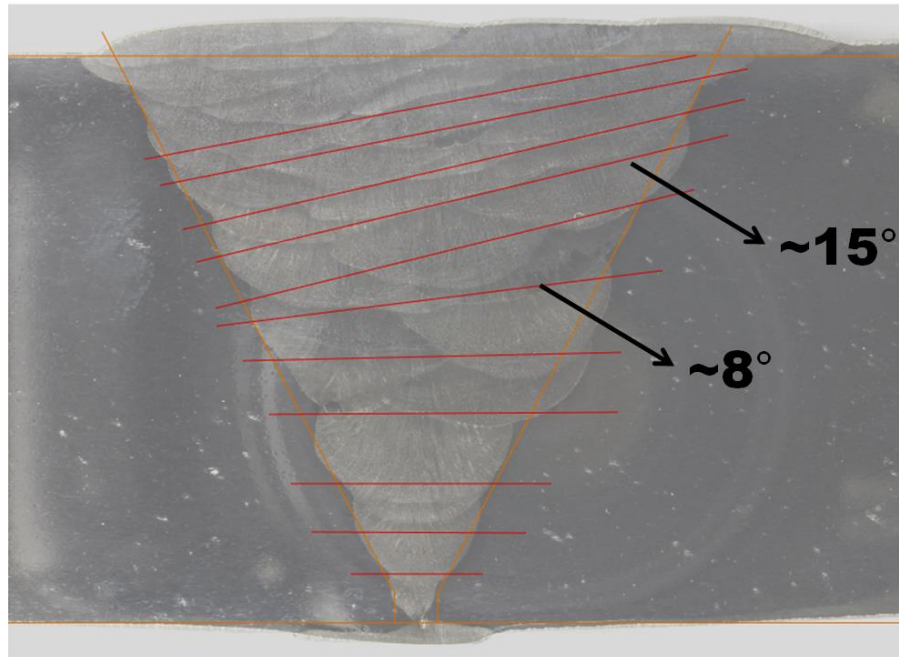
Position of the weld paths in the prepared weld sample
